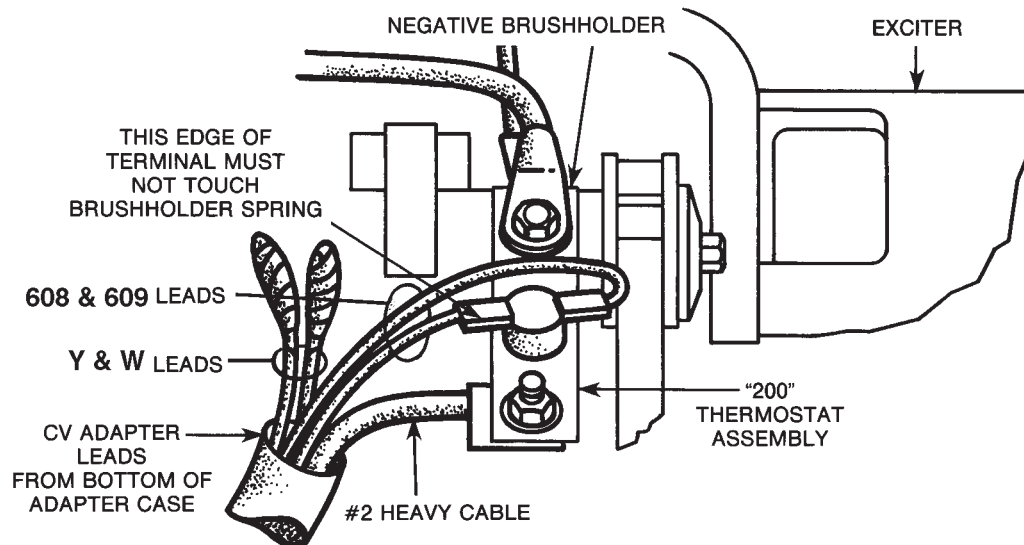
View of Negative Generator Brushholder after Bracket Cover is Removed.
